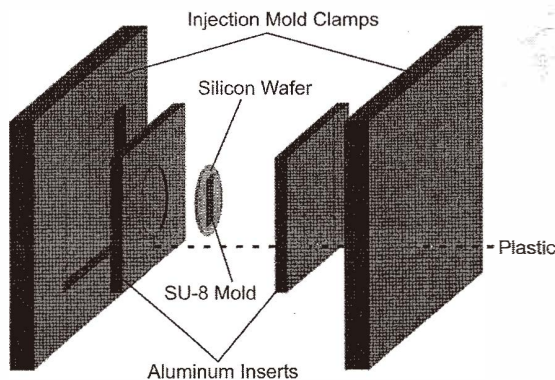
Illustration of setup for inserting the micromold into an injection molding machine. An aluminum insert is placed within the injection mold clamps. The SU-8™ master mold is then placed within the aluminum insert.
